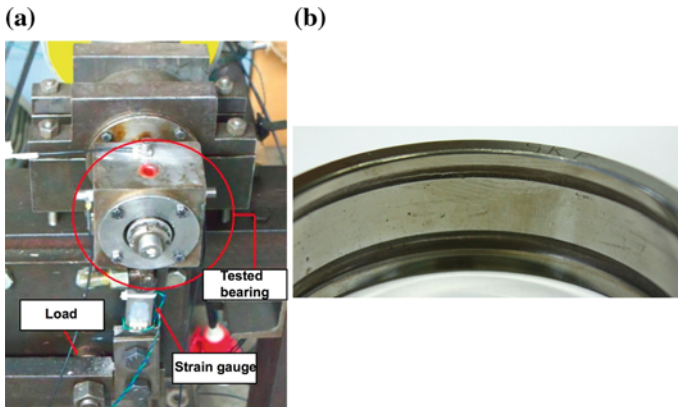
a Test rig; b Bearing outer race at the end of the test
